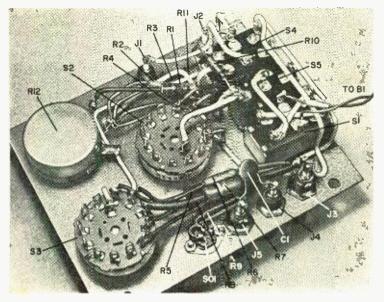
All parts except batteries and holders should be mounted on the front panel of the metal box.
